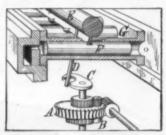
DETAILS OF SLIDING CYLINDER PUMP.
